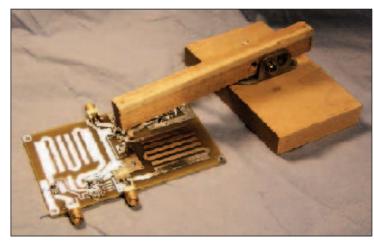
A homemade fixture used to hold the surface-mount component during soldering.
